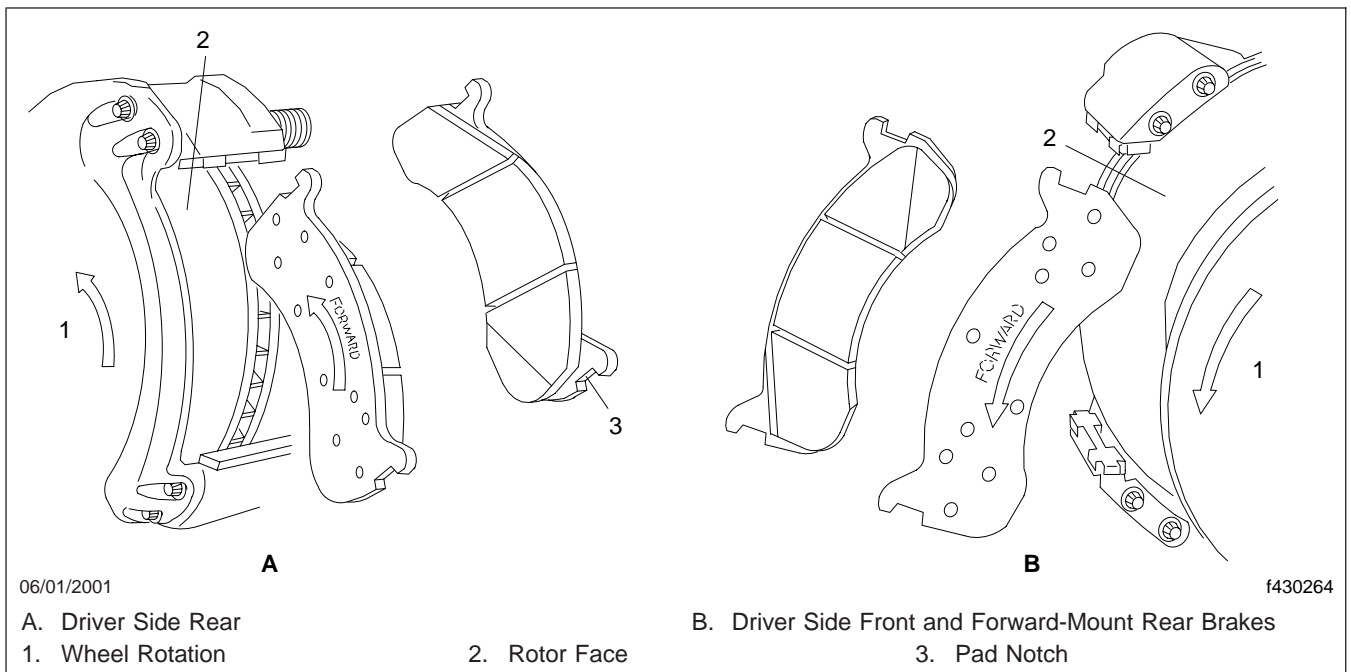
, Replacing Brake Pads on Front and Rear Brakes
